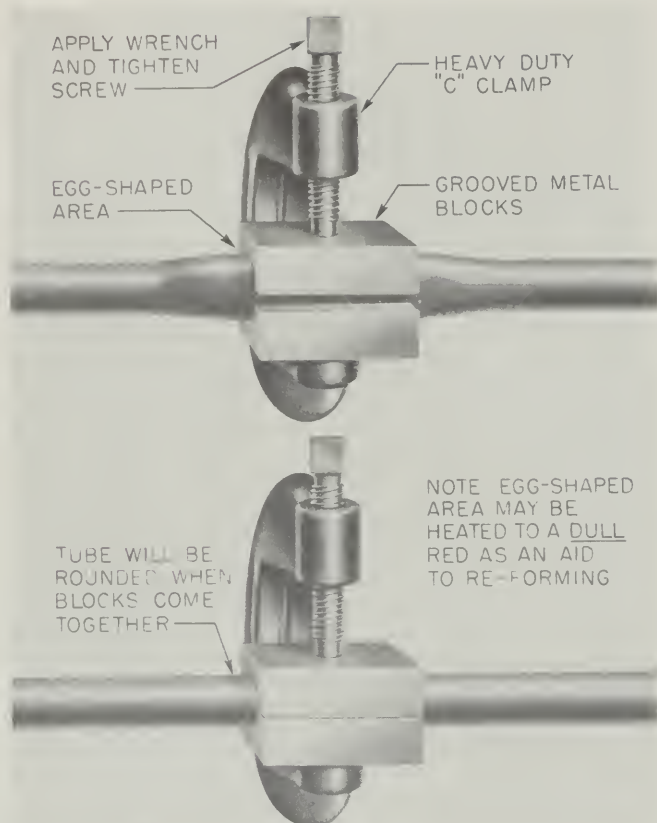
Correcting Oval-shaped Steel Tube Distortion
